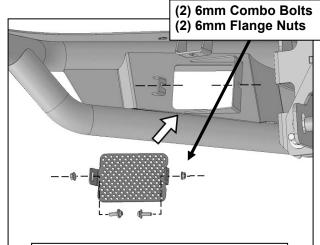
Attach driver/left Inner Support Bracket to inner side of frame
